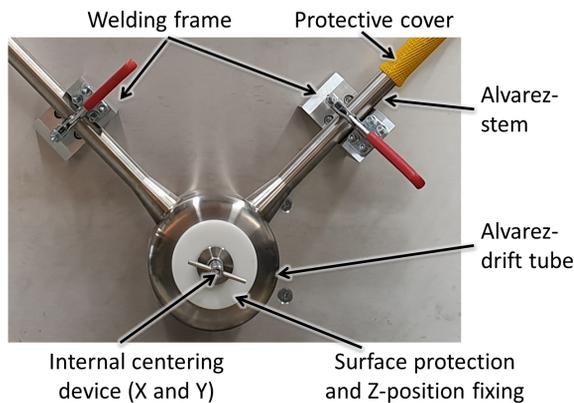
Empty drift tube for RF tests produced at GSI mechanical workshop. The picture shows the drift tube in the last welding frame for welding on the stems.
